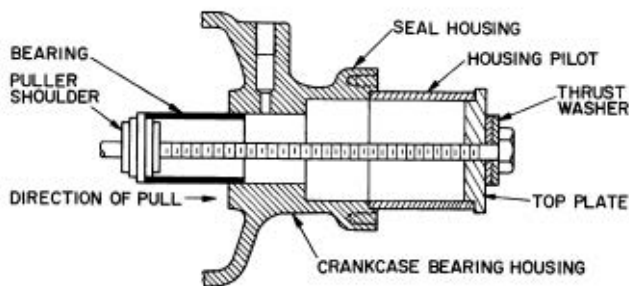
Seal-End Main Bearing (5F40, 60)
